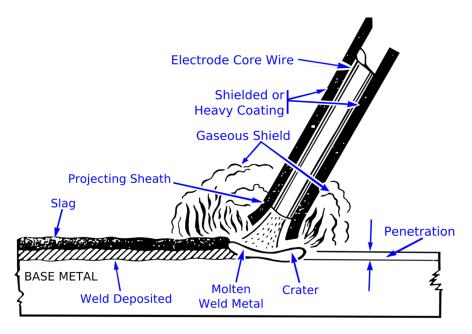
Shielded Metal Arc Welding (SMAW).
